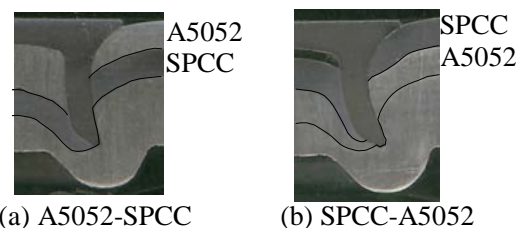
Cross-sectional shapes of rivet and sheets obtained from joining experiment for mild steel and aluminium alloy sheets
